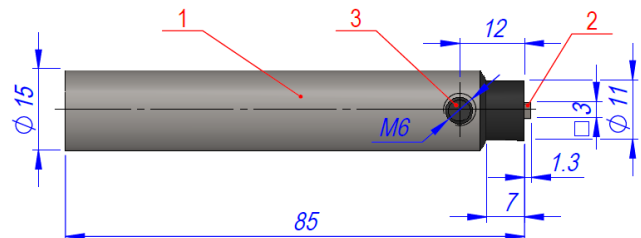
Common view of the FSW tool with dimensions: 1 - shoulder; 2 - pin; 3 - screw for fixing pin in the shoulder
